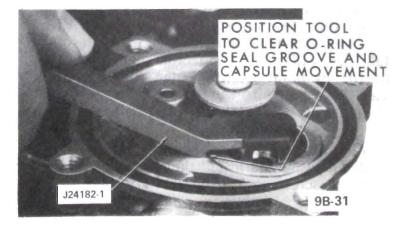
B-35 Removing POA Valve Capsule with Removal Tool
